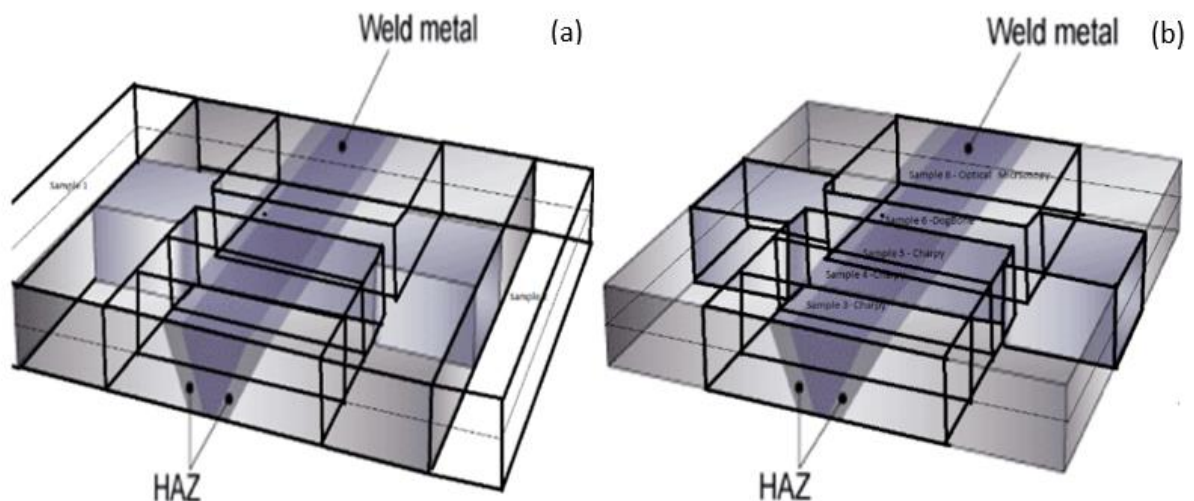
Schematic diagram of welded block of mild steel (10 mm) and stainless steel (12 mm) – to be cut into (a) Samples 1 and 2 for tensile tests (b) Five (5) samples: 1 Dog-bone, 3 Charpy and 1 microscopy sample. Specifications are 100 mm x 30 mm x 12 mm. Gauge length is 50 mm and the shoulder length are 20 mm
